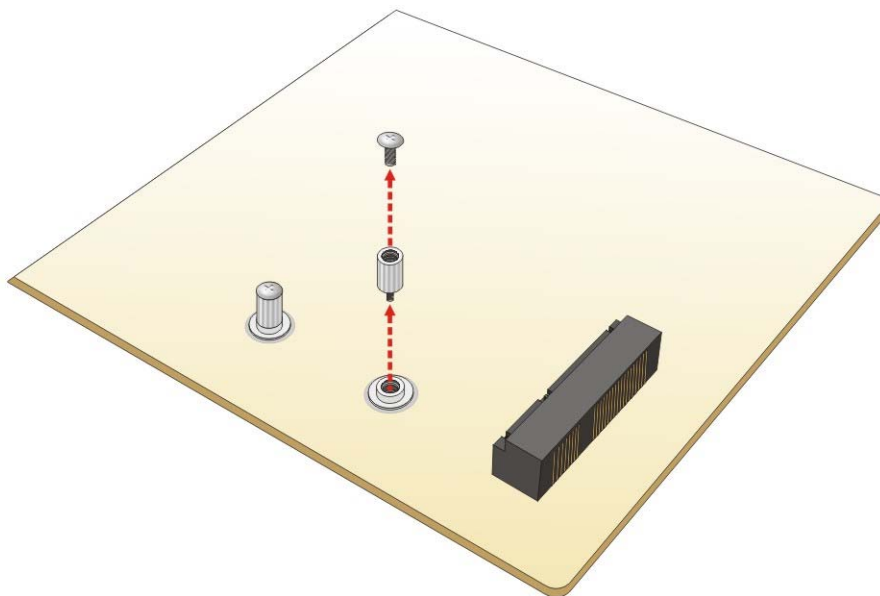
Removing the Retention Screw and Standoff for a Half-size PCIe Mini Card
